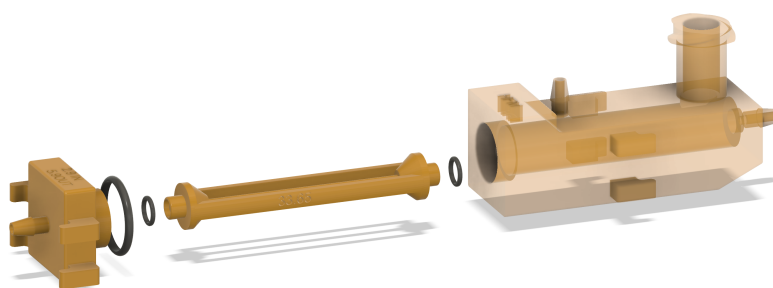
HFM chip assembly. The HFM chip consists of three parts, from left to right: the HFM chip cap, the HFM chip insert, and the HFM chip holder.
